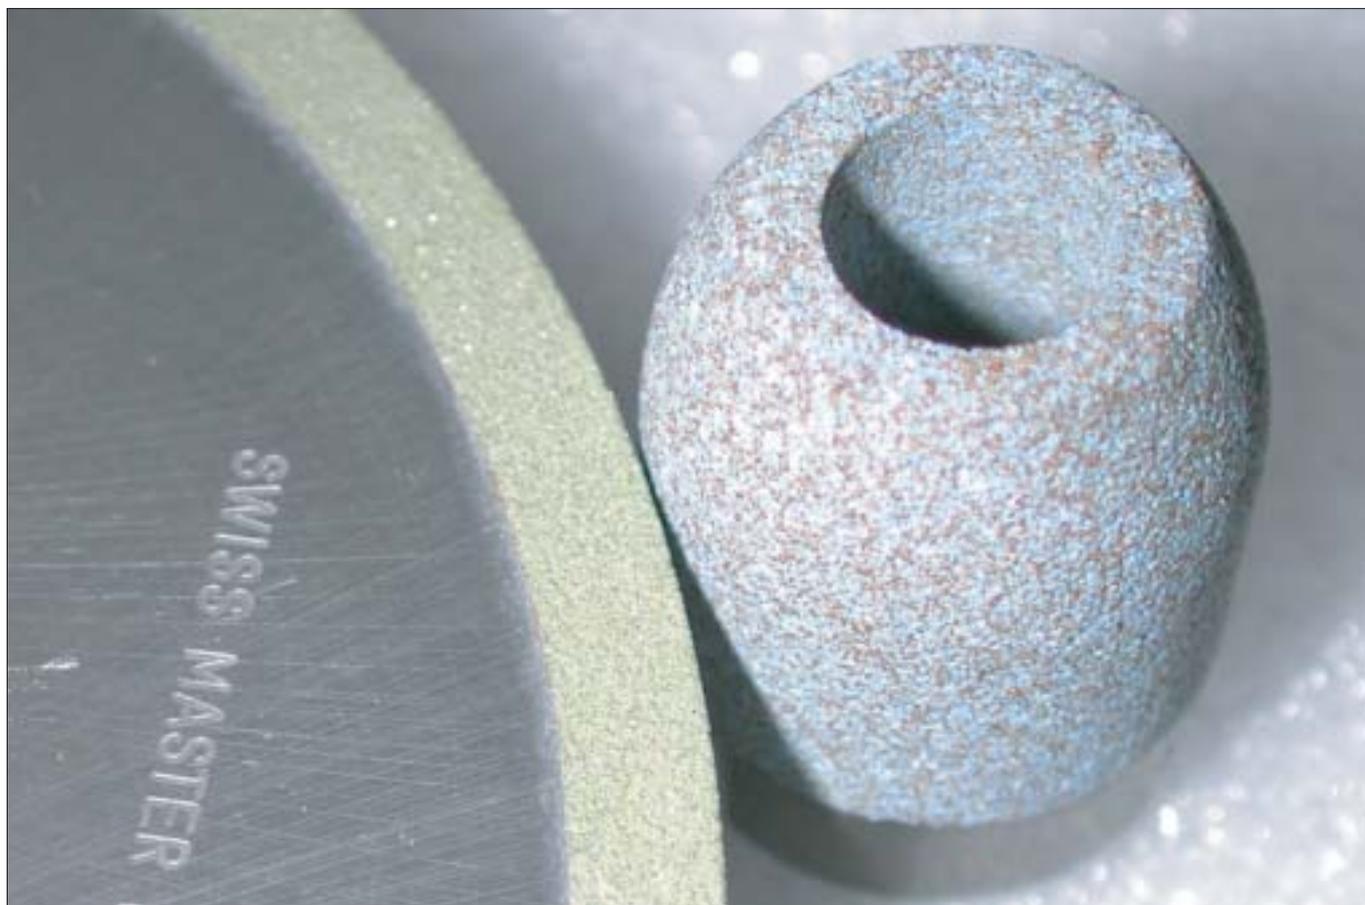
vDD tool for dressing internal cylindrical grinding wheels – external layer
